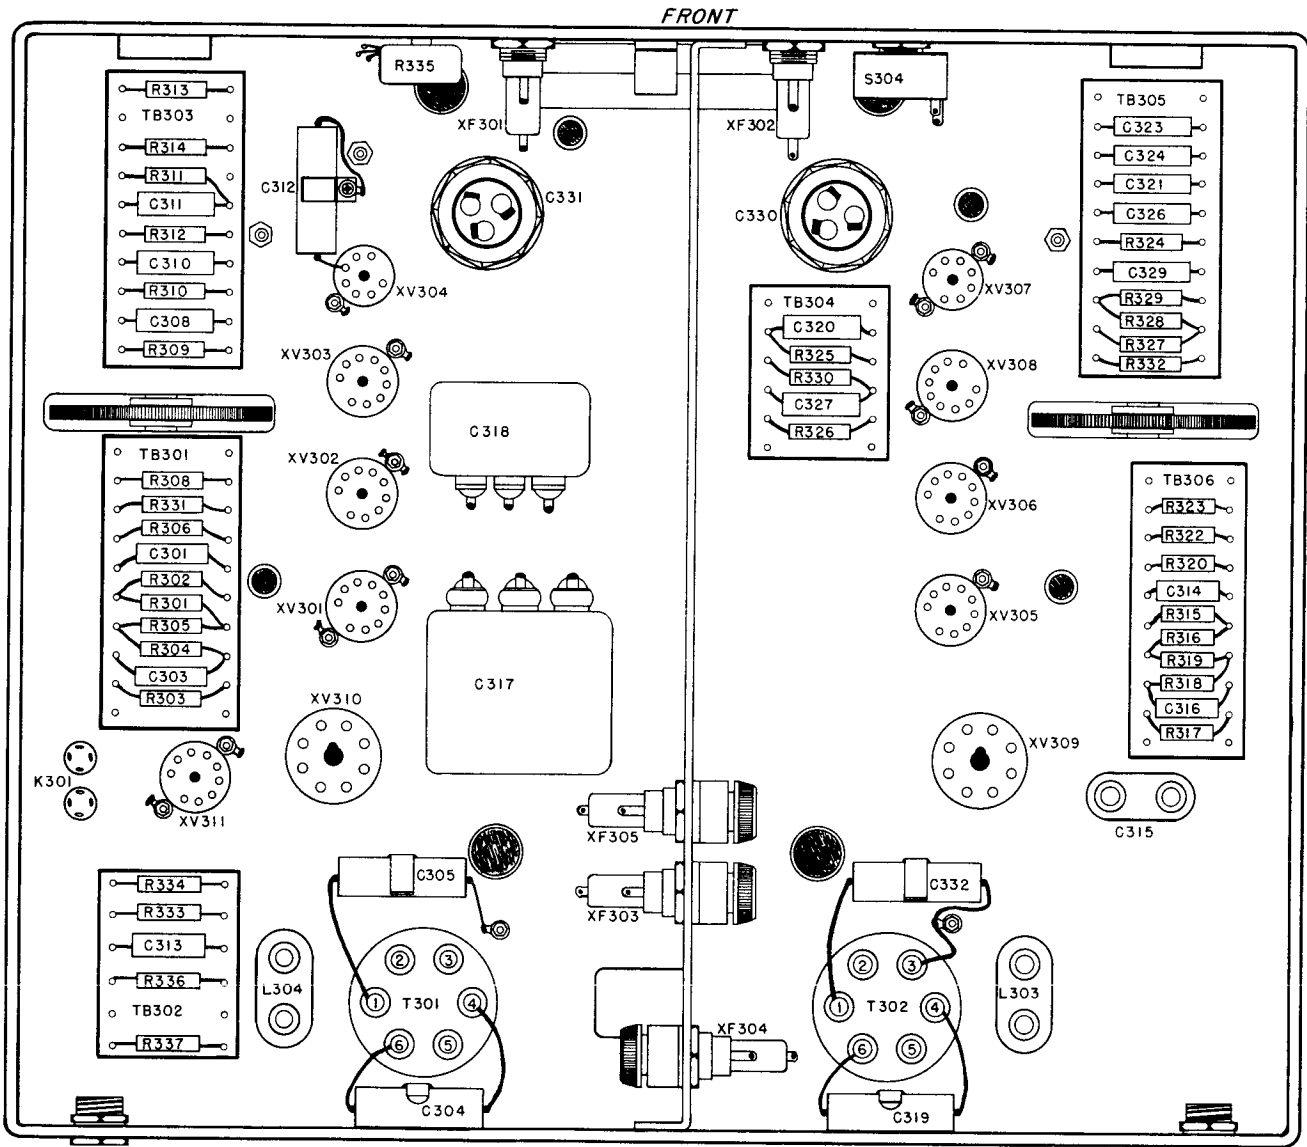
Component Locations, Bottom of Chassis, Lower Unit
